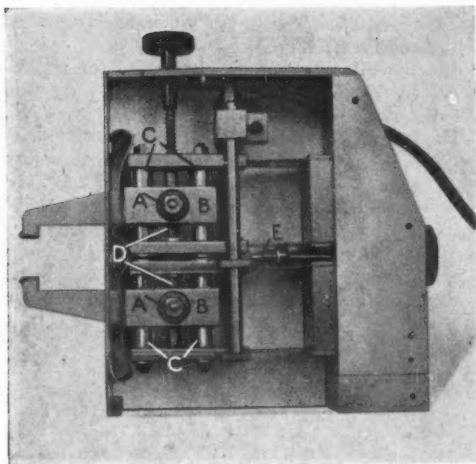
Caliper-type Air Gauging Head, with Cover Removed, Showing Details of the Jaw Suspension System and Independent Adjustment
